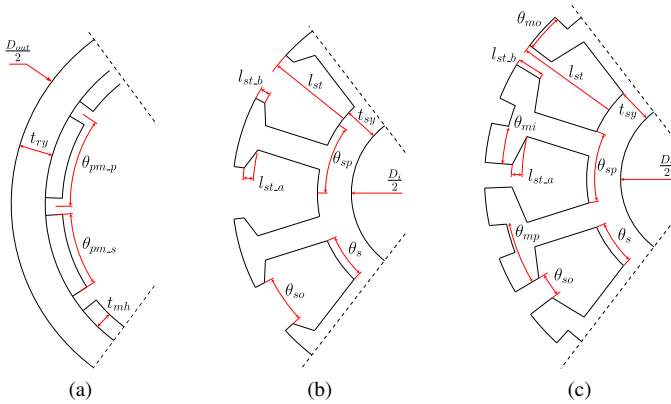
Machine geometric optimization variables: (a) Rotor (b) Conventional stator (c) Split-tooth stator.
